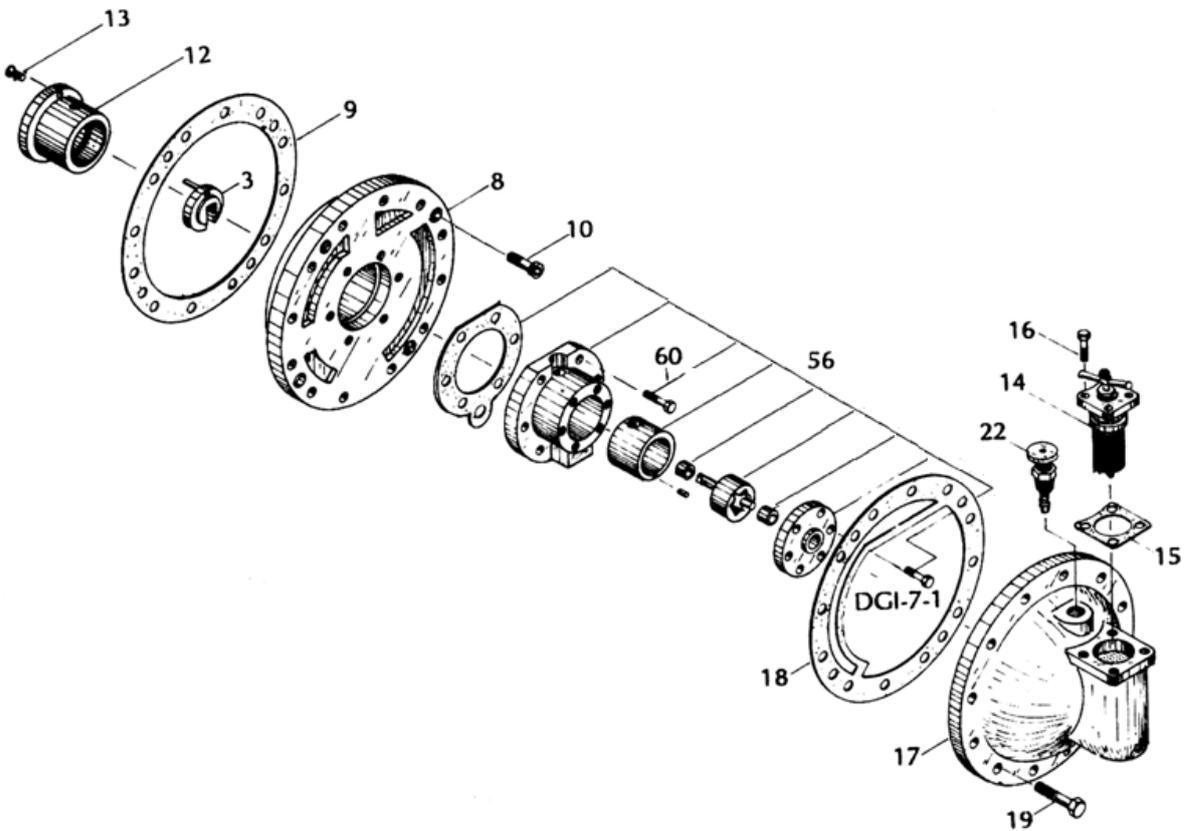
Type 12WB/12-4WB Main Bearing Head and Associated Parts
